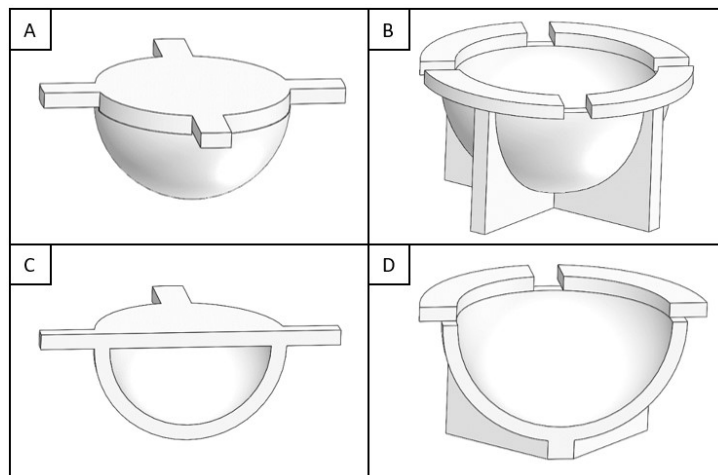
The mould used for the fabrication of the bladder phantom is modelled in SolidWorks. A) Inner part of the mould. B) Outer part of the mould. C) Cross-section of the inner part of the mould. D) Cross-section of the outer part of the mould.
